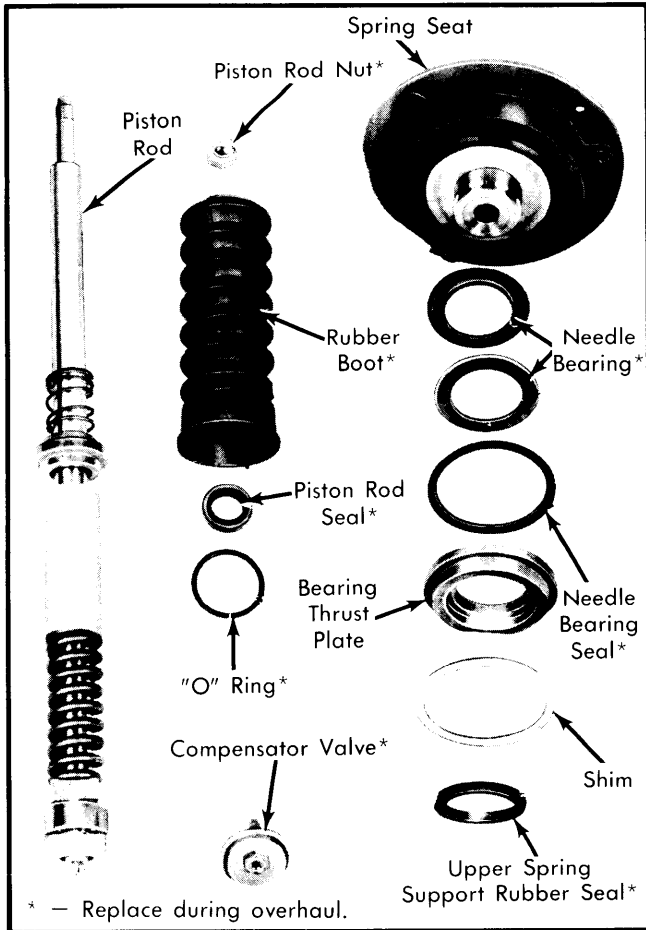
Peugeot 504 and 604 Shock Absorber and Spring Seat Components
